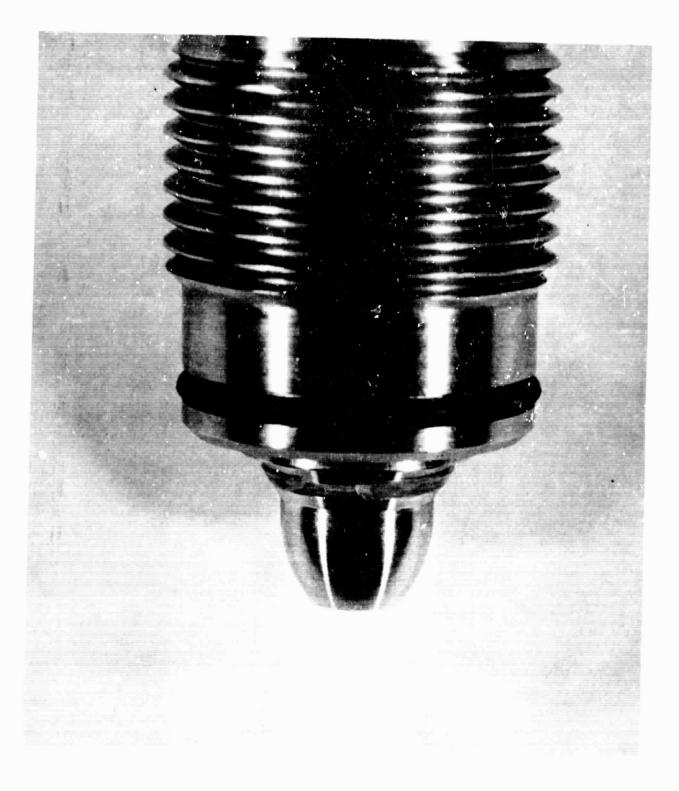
Specimen 1 Ke1-F Seat Failure
